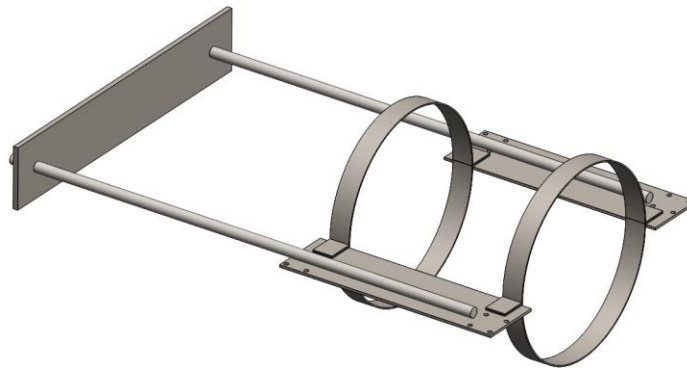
Turbojet engine harness with threaded rods connecting the plate to the clamshell mounts
